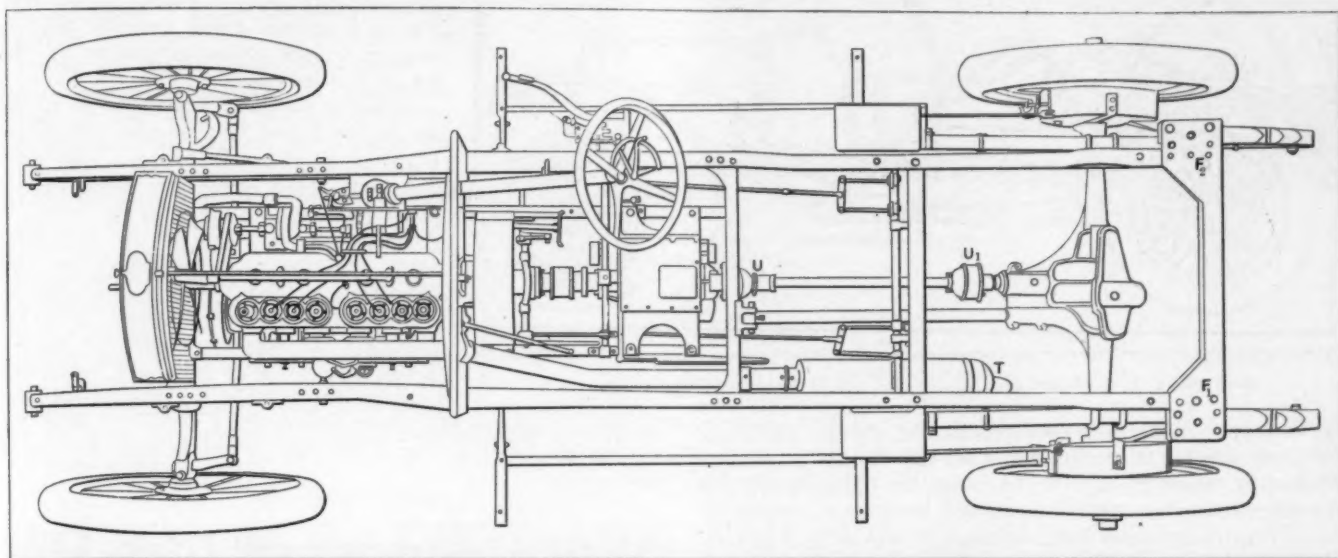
Plan view of the four-cylinder 40-horsepower chassis showing the general arrangement of the units
